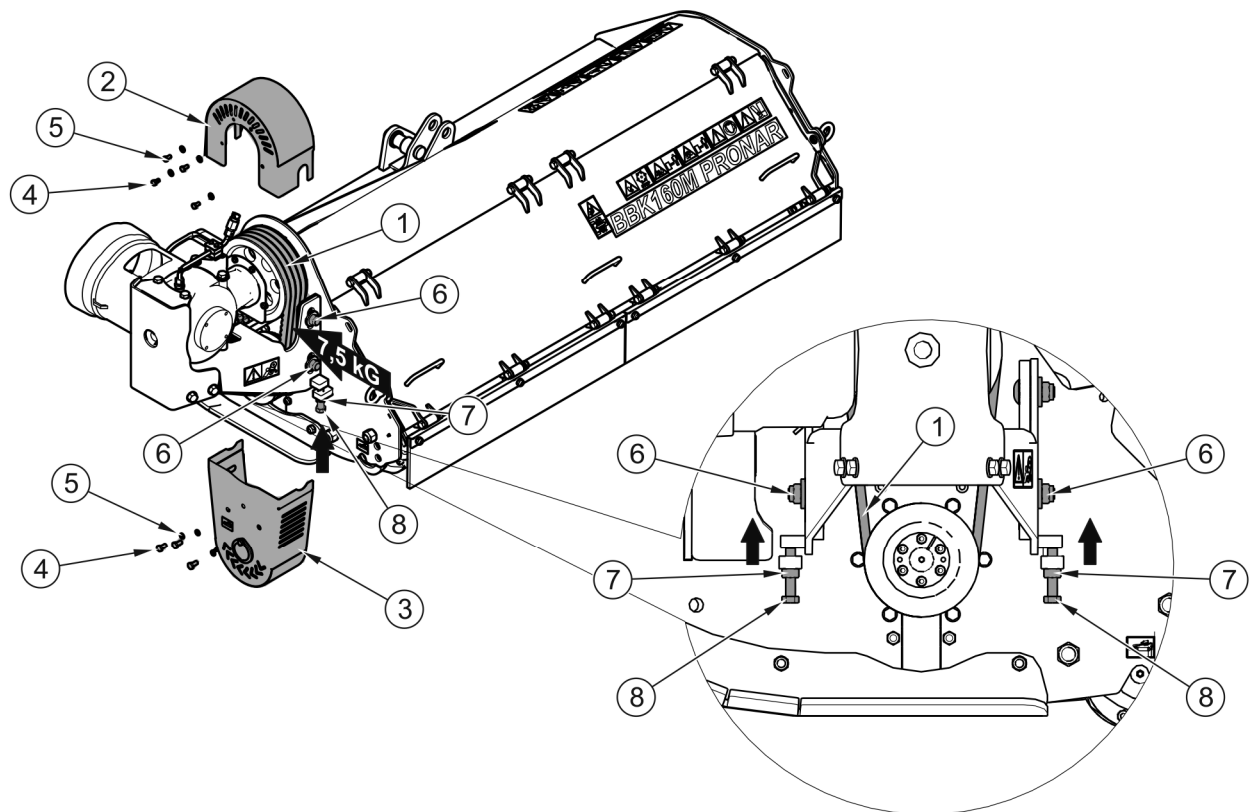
Checking and adjusting the tension of the serpentine belts
